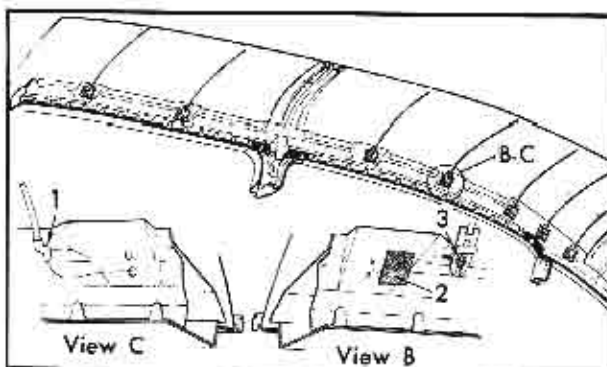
Removing Headlining Support Wires (6219, 6019)
